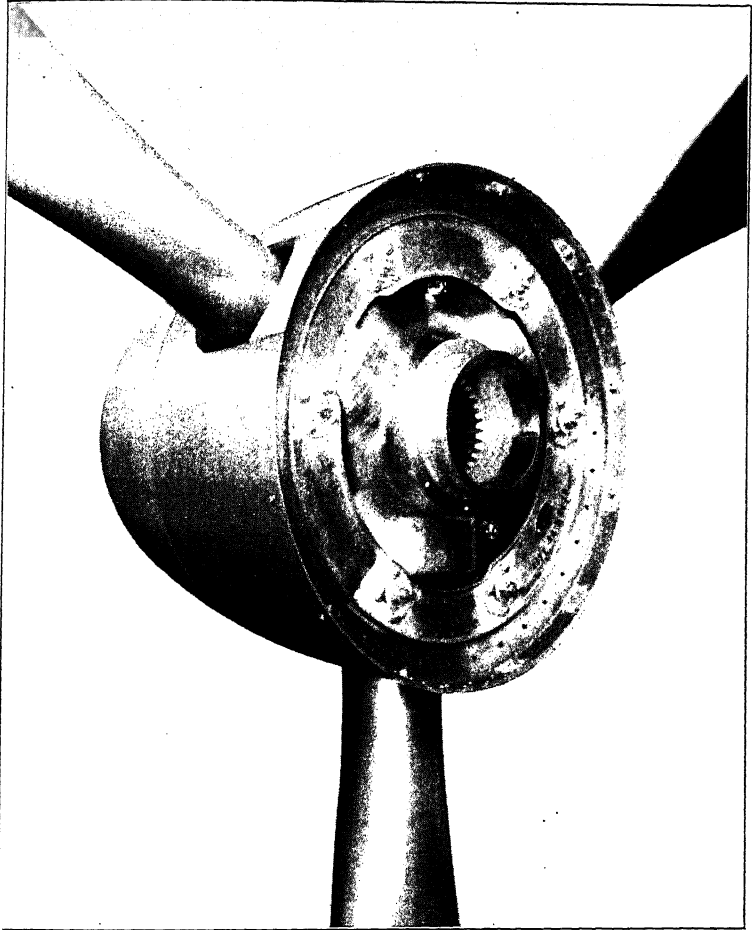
Rear view of spinner assembly. (*Courtesy Hamilton Standard Division, United Aircraft Corp.*)
